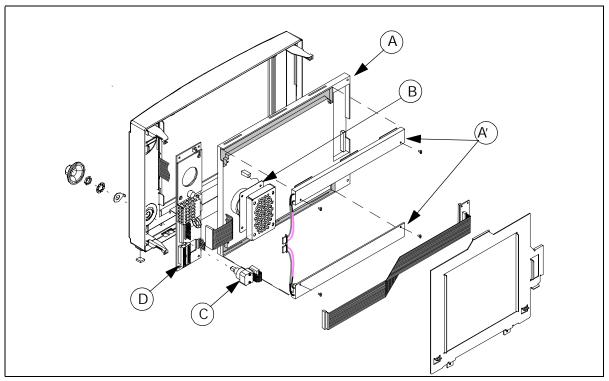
Front Panel Subassembly Exploded View - 10.4" LCD Display
